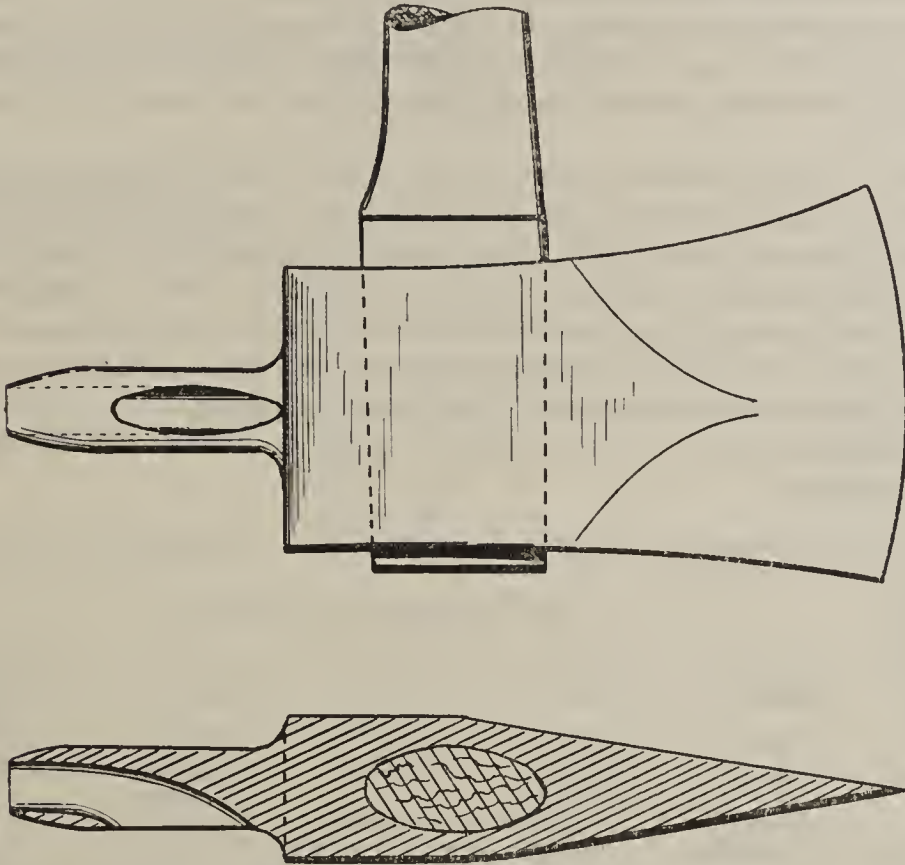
Side and sectional top view of hole-punching tool. Mounted on an ax, this punch makes cylindrical holes in the base of the tree to be filled with liquid poison. (After Pessin)
